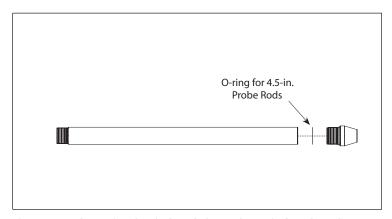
The cutting shoe is threaded onto the 4.5-inch probe rod.
